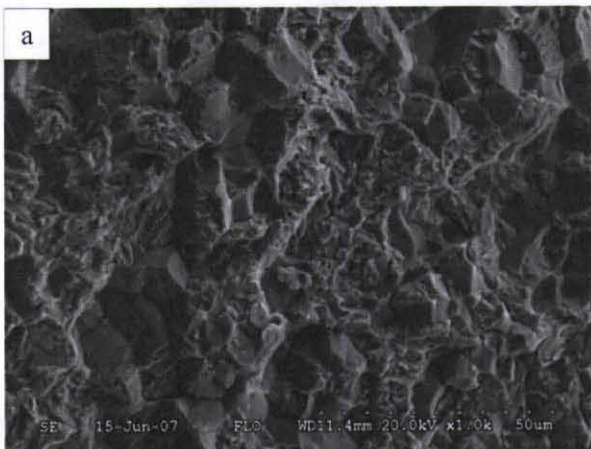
Representative pictures from fracture surface Bolt 4.
